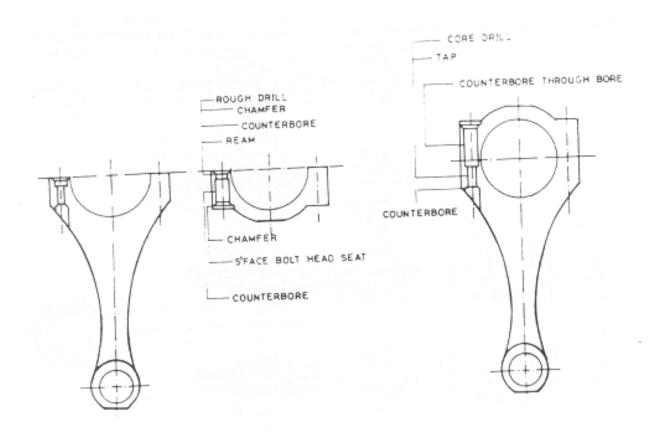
Bolt Hole Machining Operations Conventional Method (After Splitting) Vs. Fracture Splitting.
